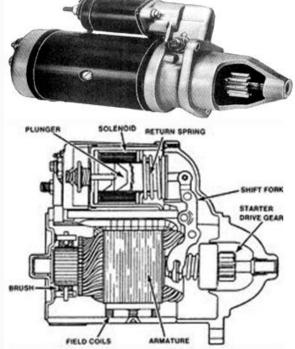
View of starter motor (Courtesy: Escort Tractor)
